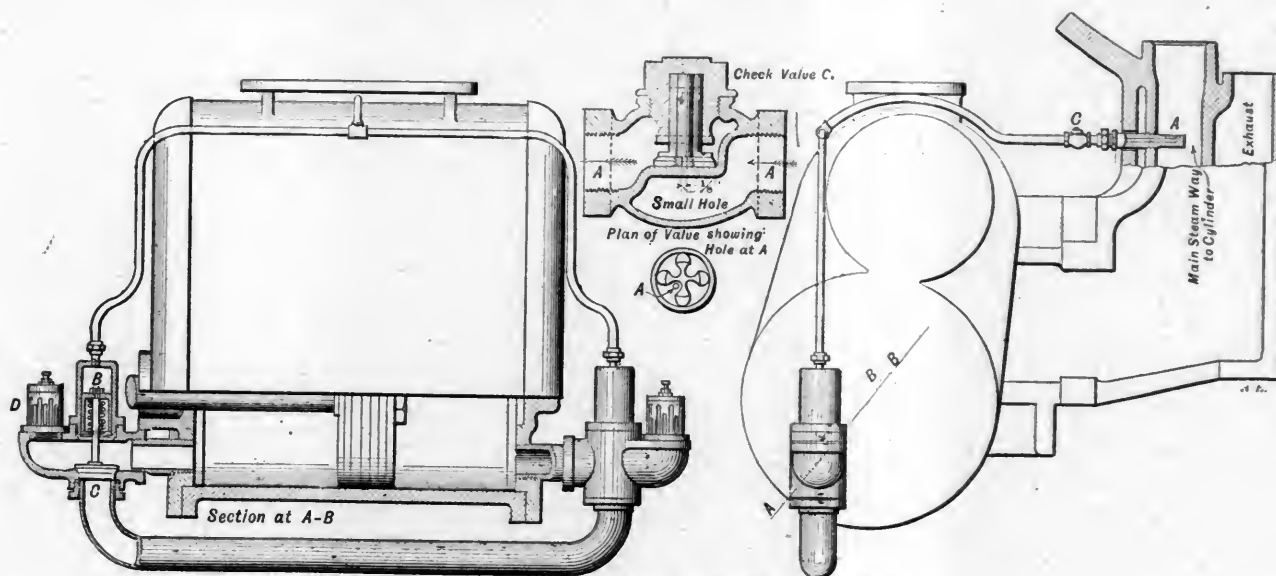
SECTION SHOWING ATTACHMENT TO CYLINDER.
